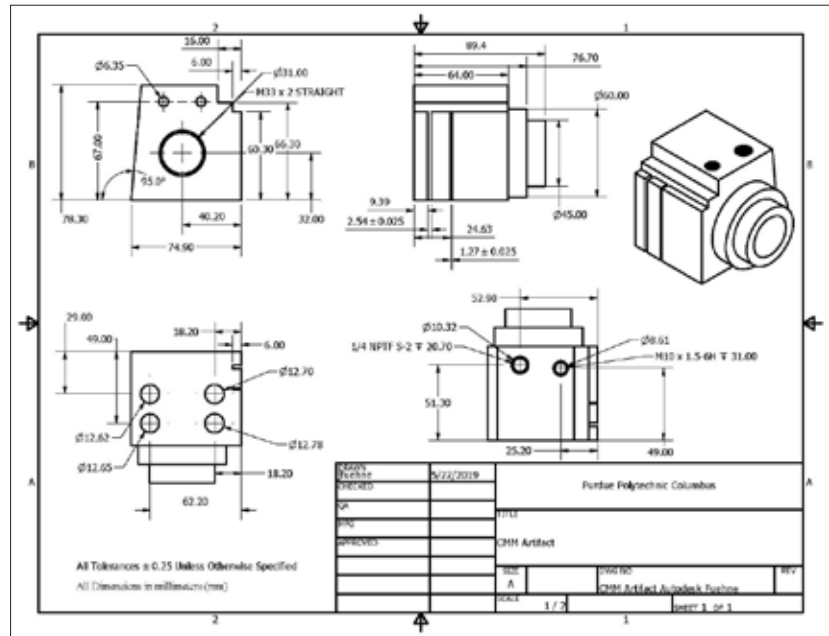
A fully dimensioned drawing of the CMM artifact used for the dimensional measurement competency testing.
